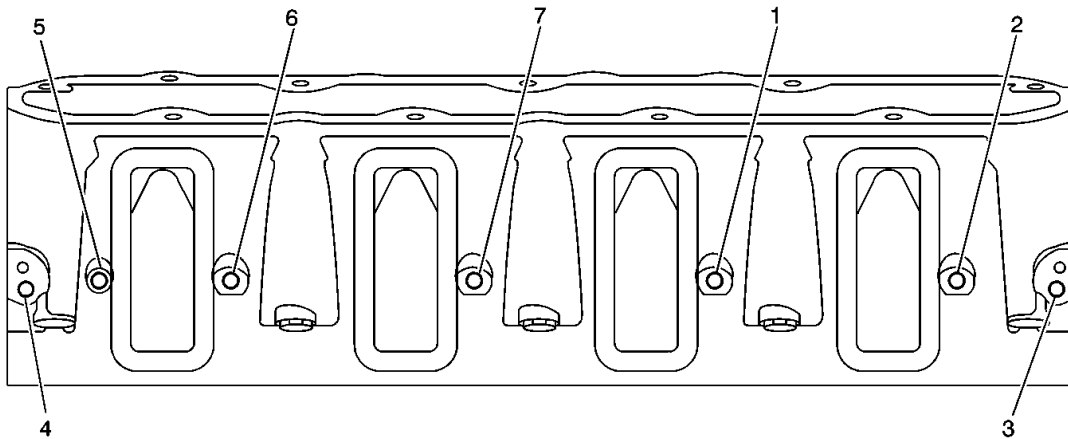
Cylinder Head Bolt Holes - Intake Manifold Deck View
